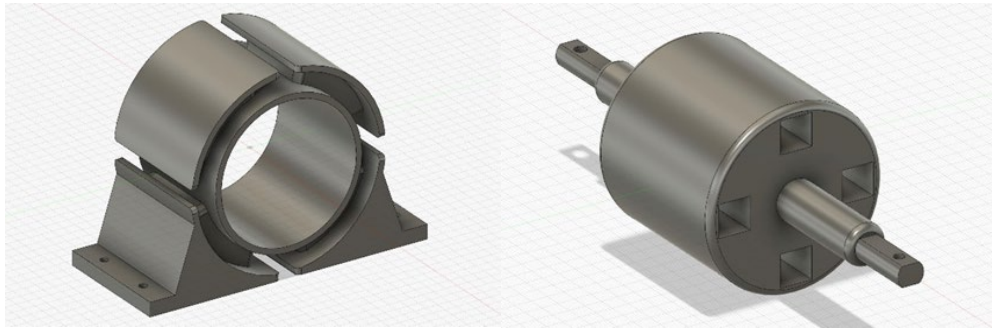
3D printed components of the generator: (Left) Stator, (Right) Rotor.
